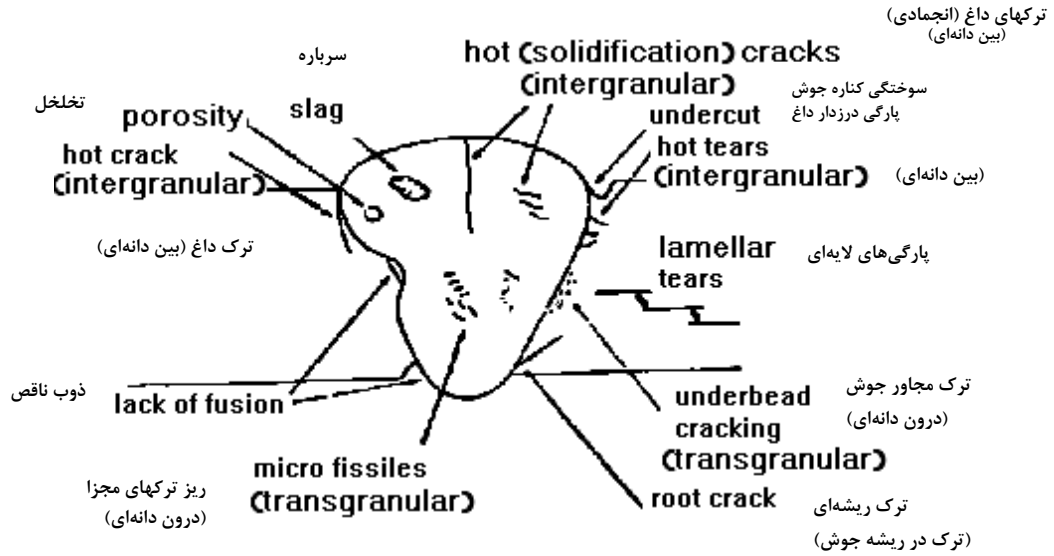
POSSIBLE WELD DEFECTS
